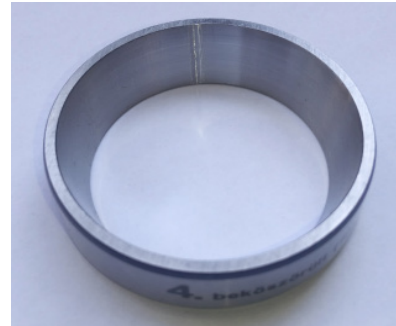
Outer ring of the tapered roller bearing with grinding defect of 1.6236 mm
